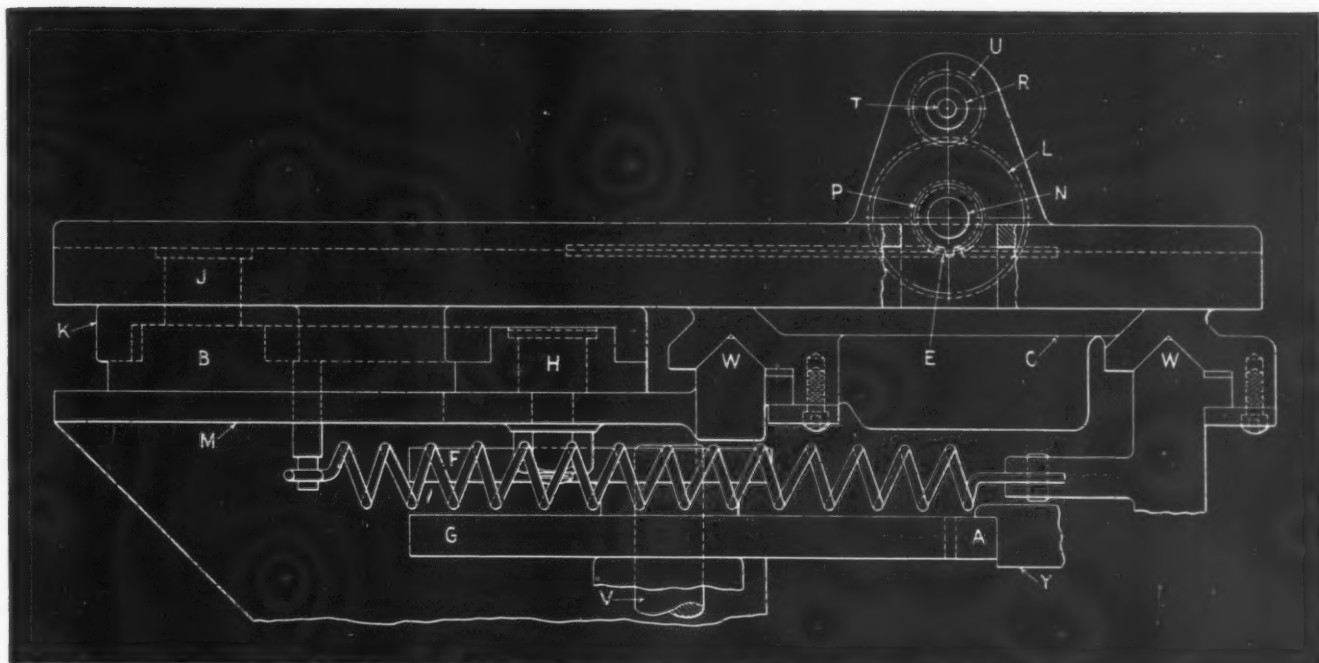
Left-hand End View of the Rifling Device Shown in Fig. 1
